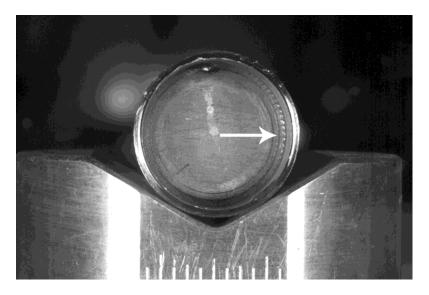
The Interior of the Strength Member Showing the Lid and Interior Weld Surface. Arrow Indicates the Interior Weld Surface Which will be Examined by SEM.
